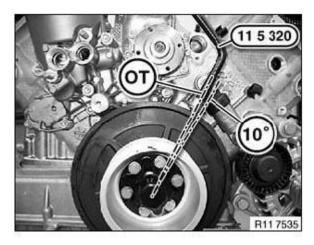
Securing Crankshaft With Special Tool (11 5 320) Courtesy of BMW OF NORTH AMERICA, INC.
